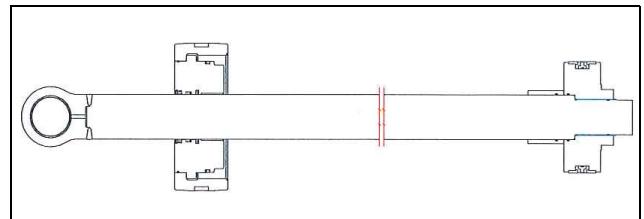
Fix Rod Assembly (Tower lift Cylinder)
